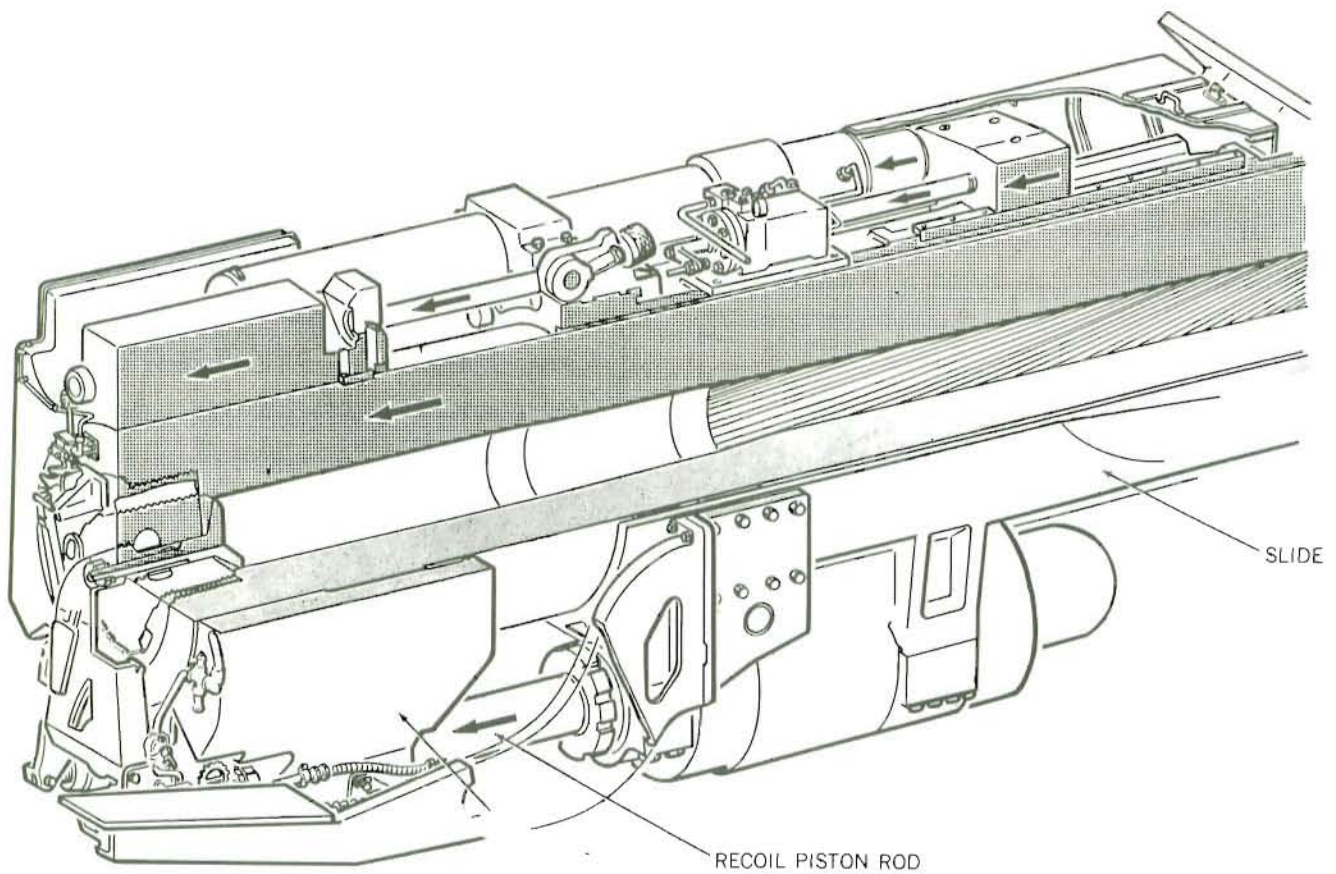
A. 16-inch Gun Assemblies. Firing Gun Recoiling.
